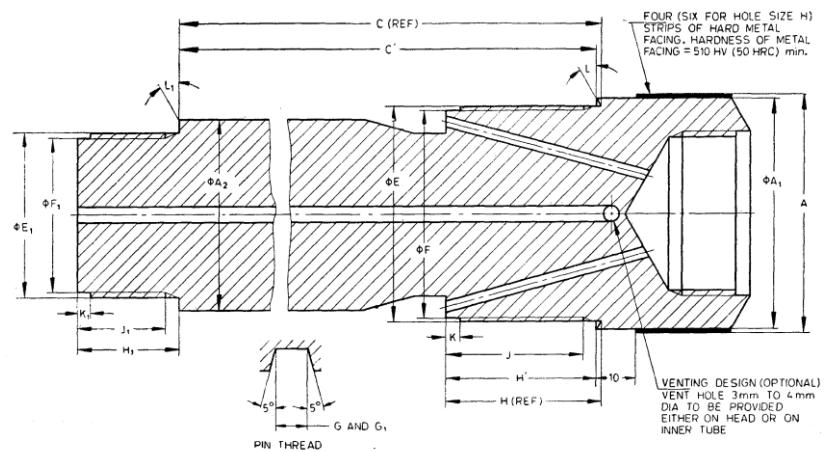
'WG' DESIGN DOUBLE TUBE CORE BARREL — INNER TUBE
